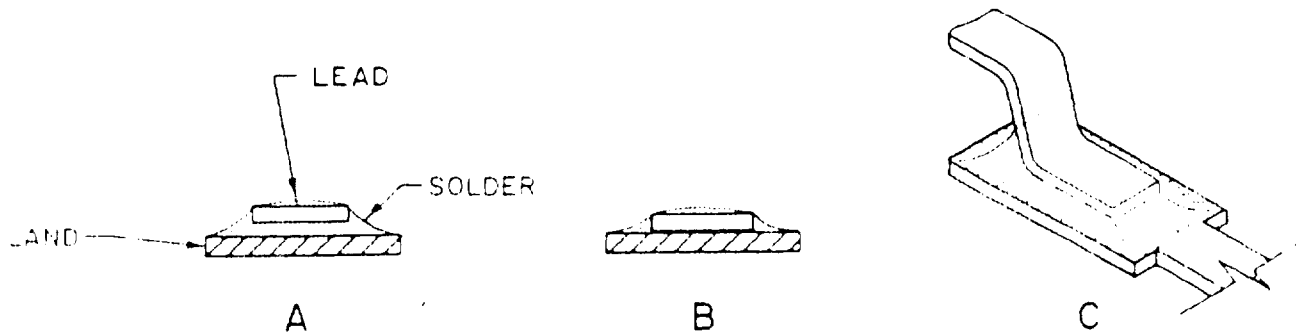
Planar mounted device flat lead solder fillet (4.19.5.4).
